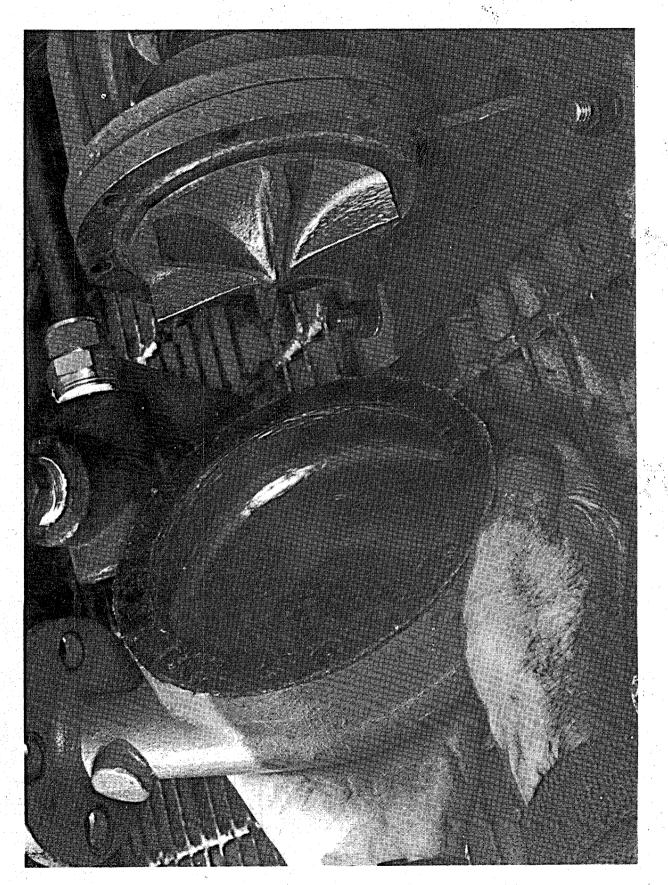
Pump Casing and Impeller After First 100 Hour Test
